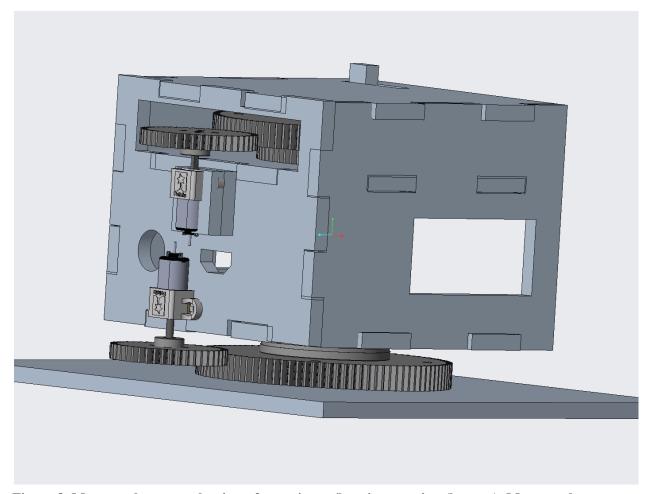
Motor and gear mechanisms for projector/housing rotation (bottom). Motor and gear mechanism for focus toggling (top)
